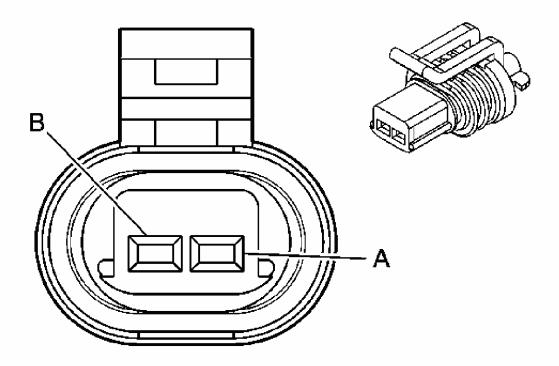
Brake Fluid Level Switch Connector End View Courtesy of GENERAL MOTORS CORP.
